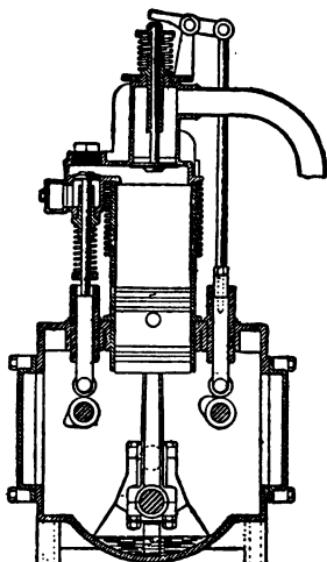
Section of a cylinder having positively operated exhaust valve in the cylinder head. The extra area of the exhaust valve is provided for the purpose of expediting the exhaust, thus assisting in the cooling of the cylinder.
